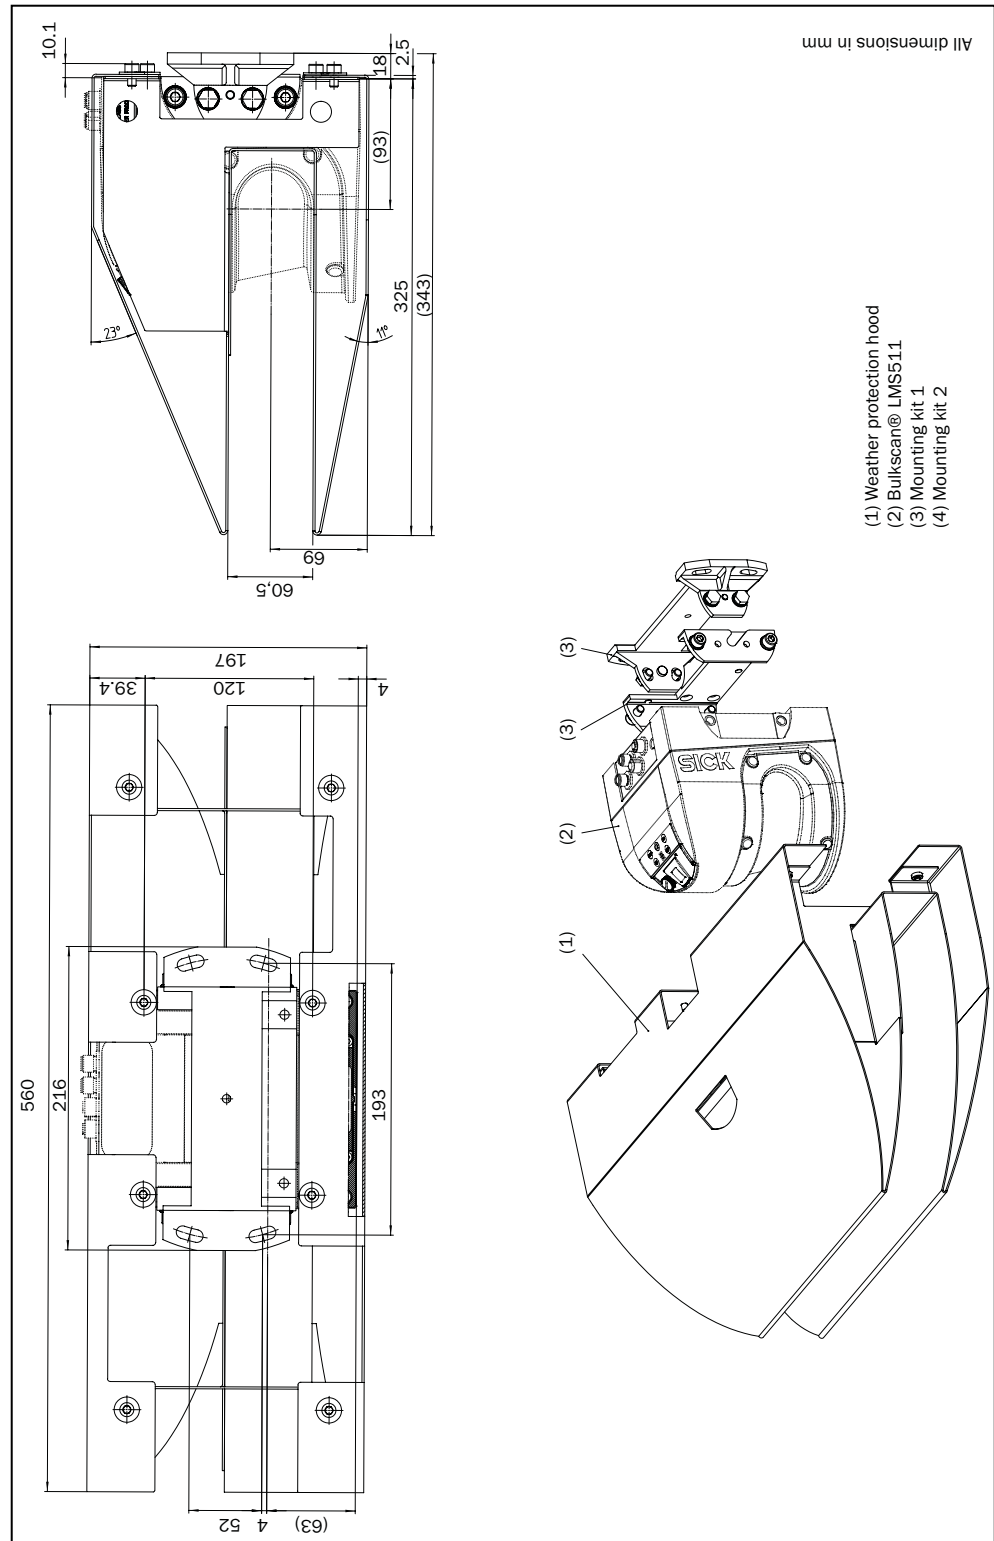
Dimensional drawing weather protection hood (part. no 2063050)
